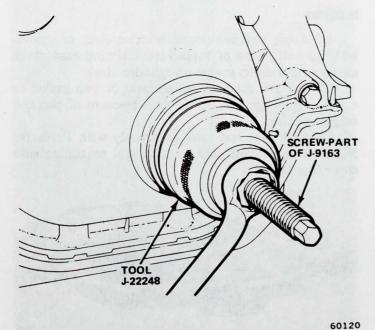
B-86 Timing Case Cover Oil Seal Installation
